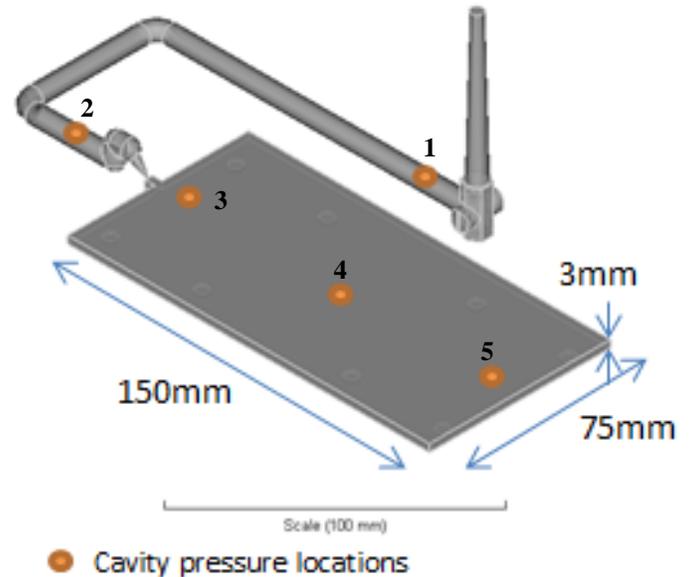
Schematic showing the location of the pressure sensors within the plaque mold.
